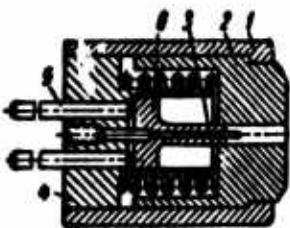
Die for monoposition upsetting of a half-hollow rivet on a standard cold-upsetting automatic machine: 1 - body; 2 - and 4 - inserts; 3 - piercing needle; 5 - rods; 6 - ejector.
